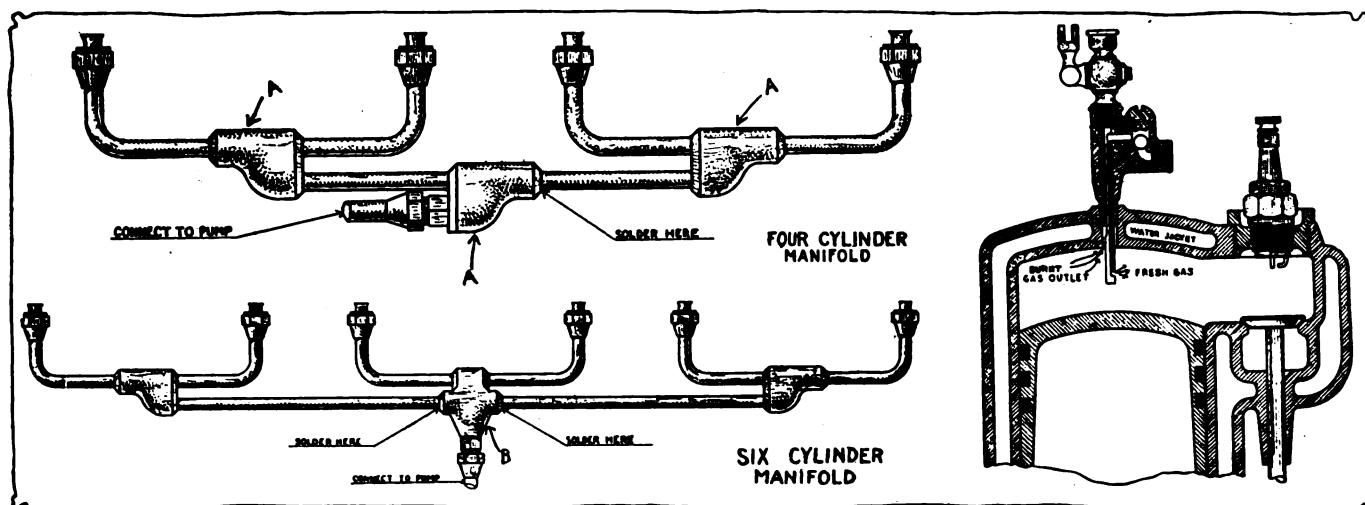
Starting manifolds used in installing the Shur-Go gasoline apparatus; section through check valve
